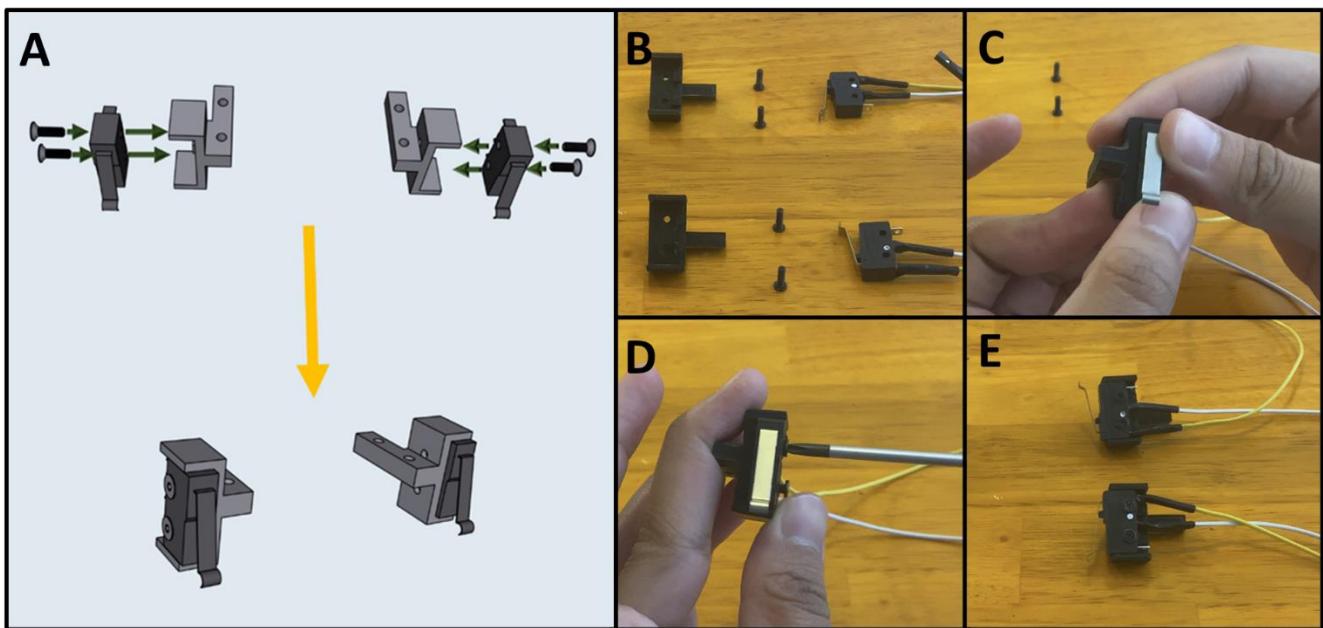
e: The procedure for attaching the limit switches to their mounts.
